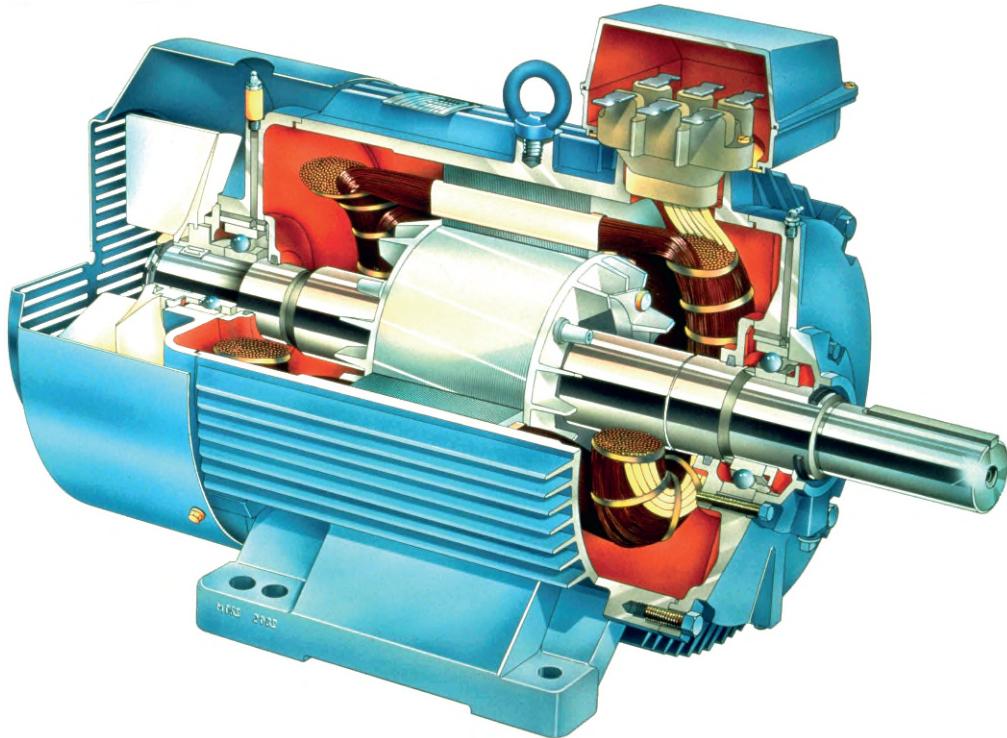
A Sectional view of a squirrel cage AC induction motor
